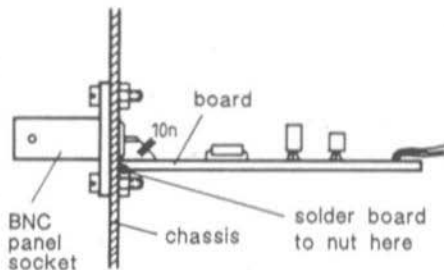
Construction detail: Connection of input-BNC socket to printed circuit board
